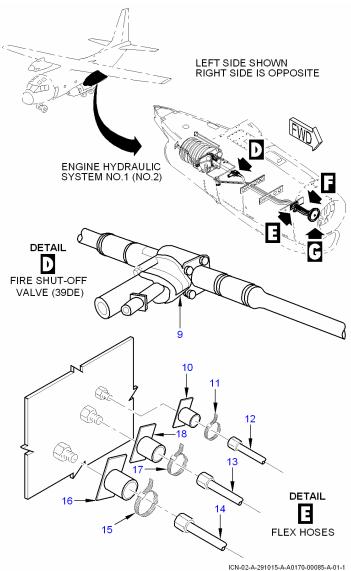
Engine Driven Pump - Removal and Installation (sheet 3/5)
